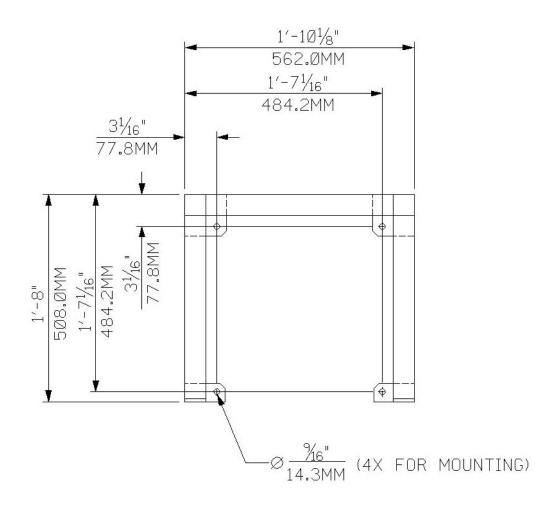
Mounting Hole Locations 1 Cylinder Rack or 1 Cylinder Euro Rack
